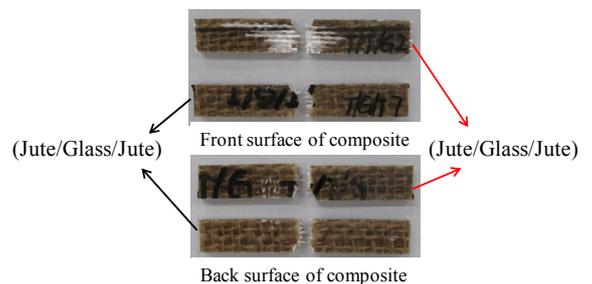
Photographs showing fracture surface of natural dried hybrid composites after Izod impact test
